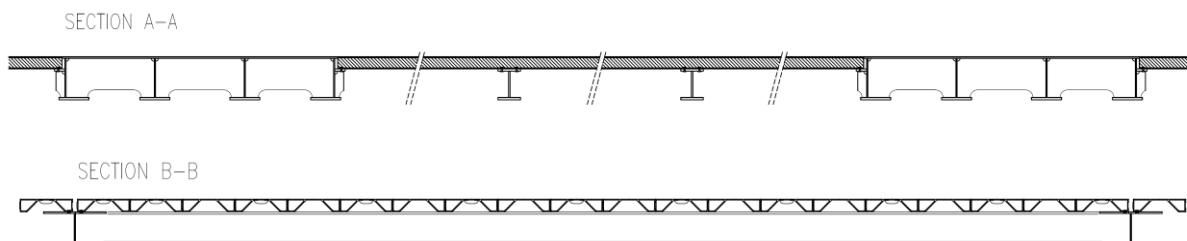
RAMSSES deck arrangement – grillage system alternative 2 - cross sections
